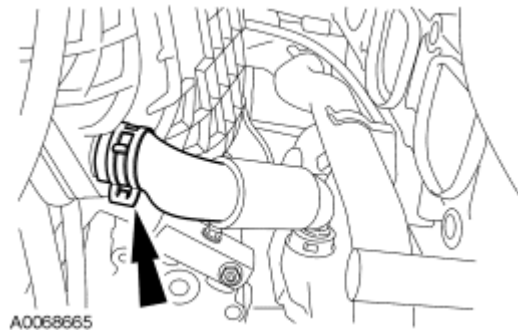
Locating Positive Crankcase Ventilation (PCV) Hose
